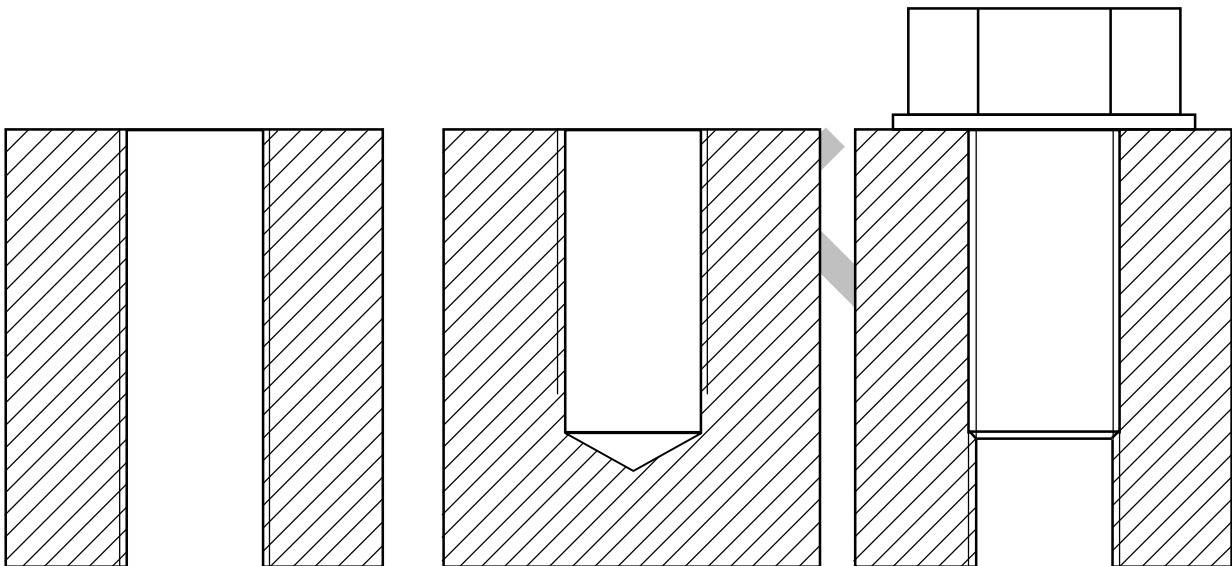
Three examples of sectioned threaded holes: left, a through hole; centre, a blind hole; and right, a threaded through hole with a bolt in place.
